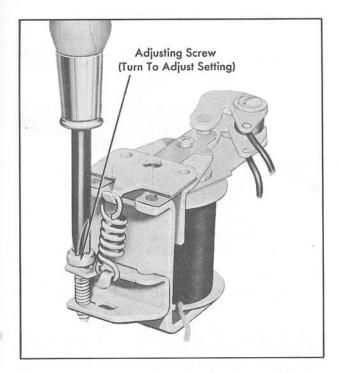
Adjusting Voltage Regulator Lower Contacts
